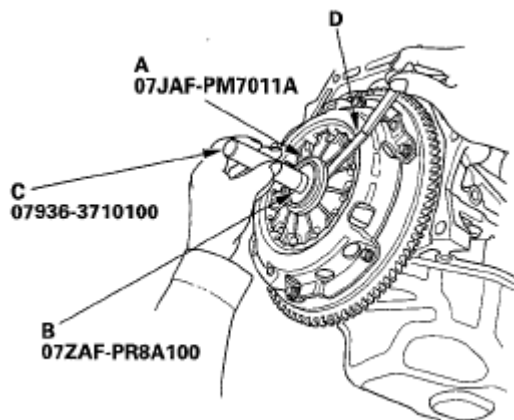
Checking Height Of Diaphragm Spring Fingers Clutch Alignment Disc
